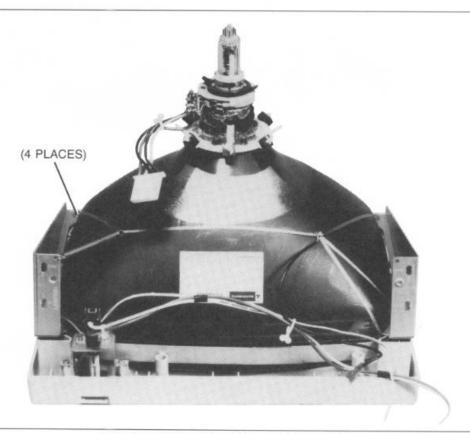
CRT REMOVAL/REPLACEMENT
